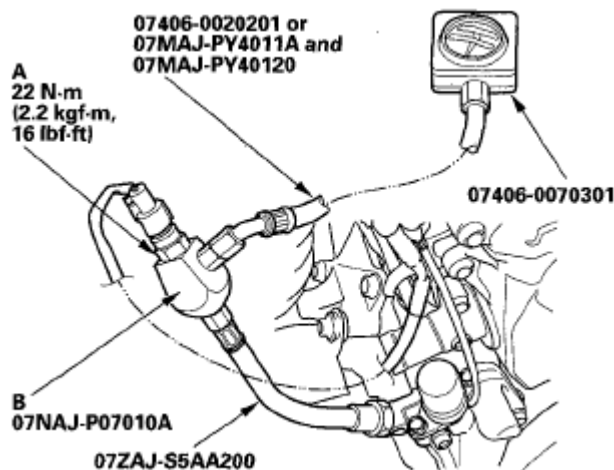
Identifying Rocker Arm Oil Pressure Switch And Pressure Gauge Adapter With Torque Specifications
